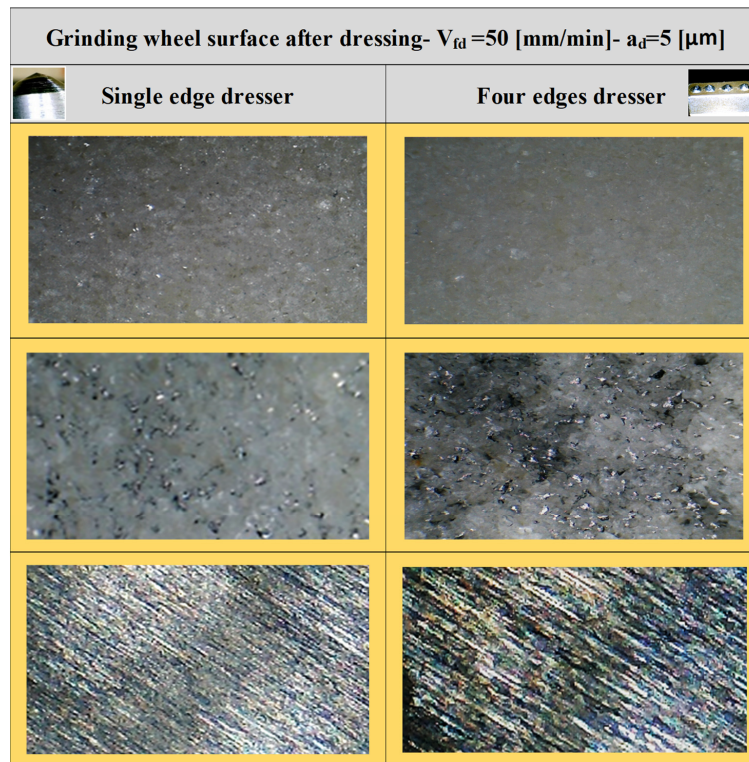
Detailed wheel surface topography, chip loading and workpiece surface morphology after grinding using single-edge and four-edge dressers in wet grinding of Inconel 738 with $V_{ft} = 15$ m/min, $a_e = 30$ µm and $V_c = 47$ m/s (magnification: 200×).
